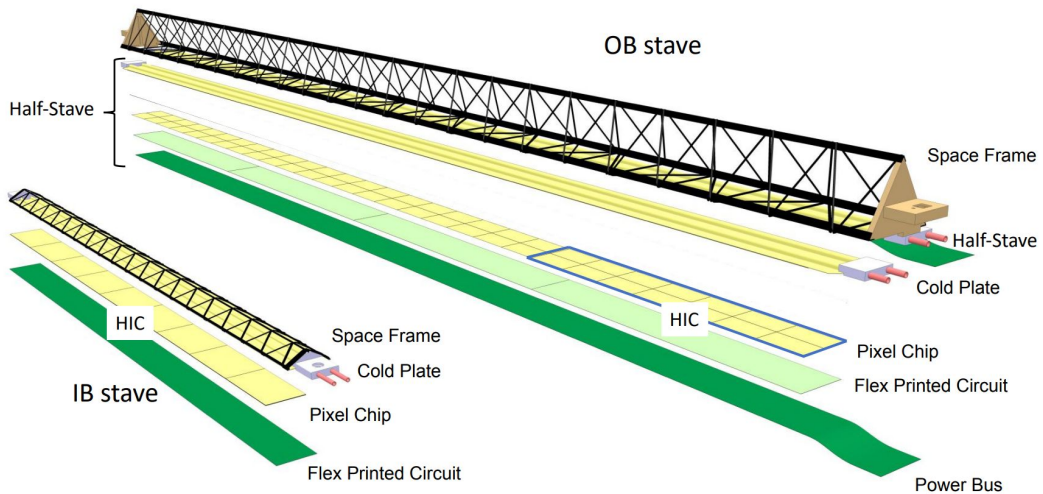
Exploded layout showing elements of the ITS2 inner (IB) and outer (OB) barrel staves. Taken from [39, 40].
